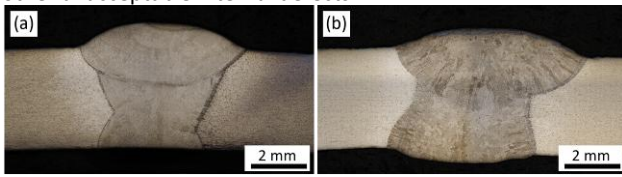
The macrostructure of as-welded (a) sample A and (b) sample B. The substitutive steel is on the left towards the weld metal.
